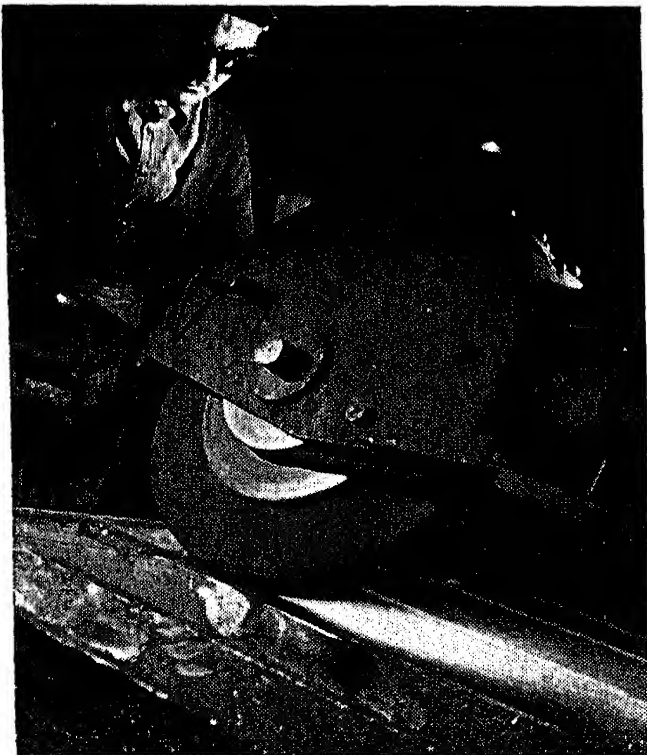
A swing frame grinder in operation. (Courtesy The Carborundum Co.)
